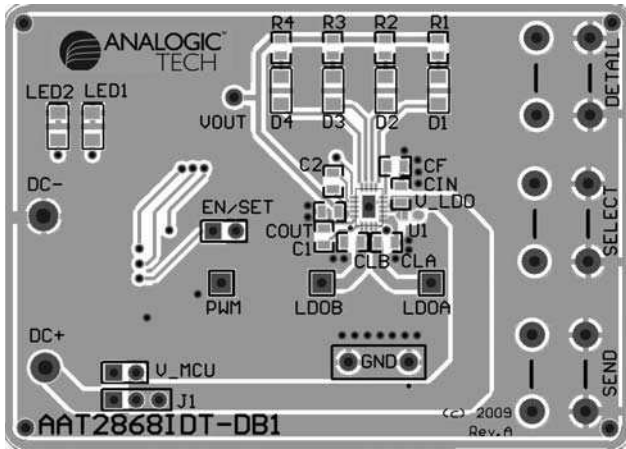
AAT2868 Evaluation Board Top Side Layout.
